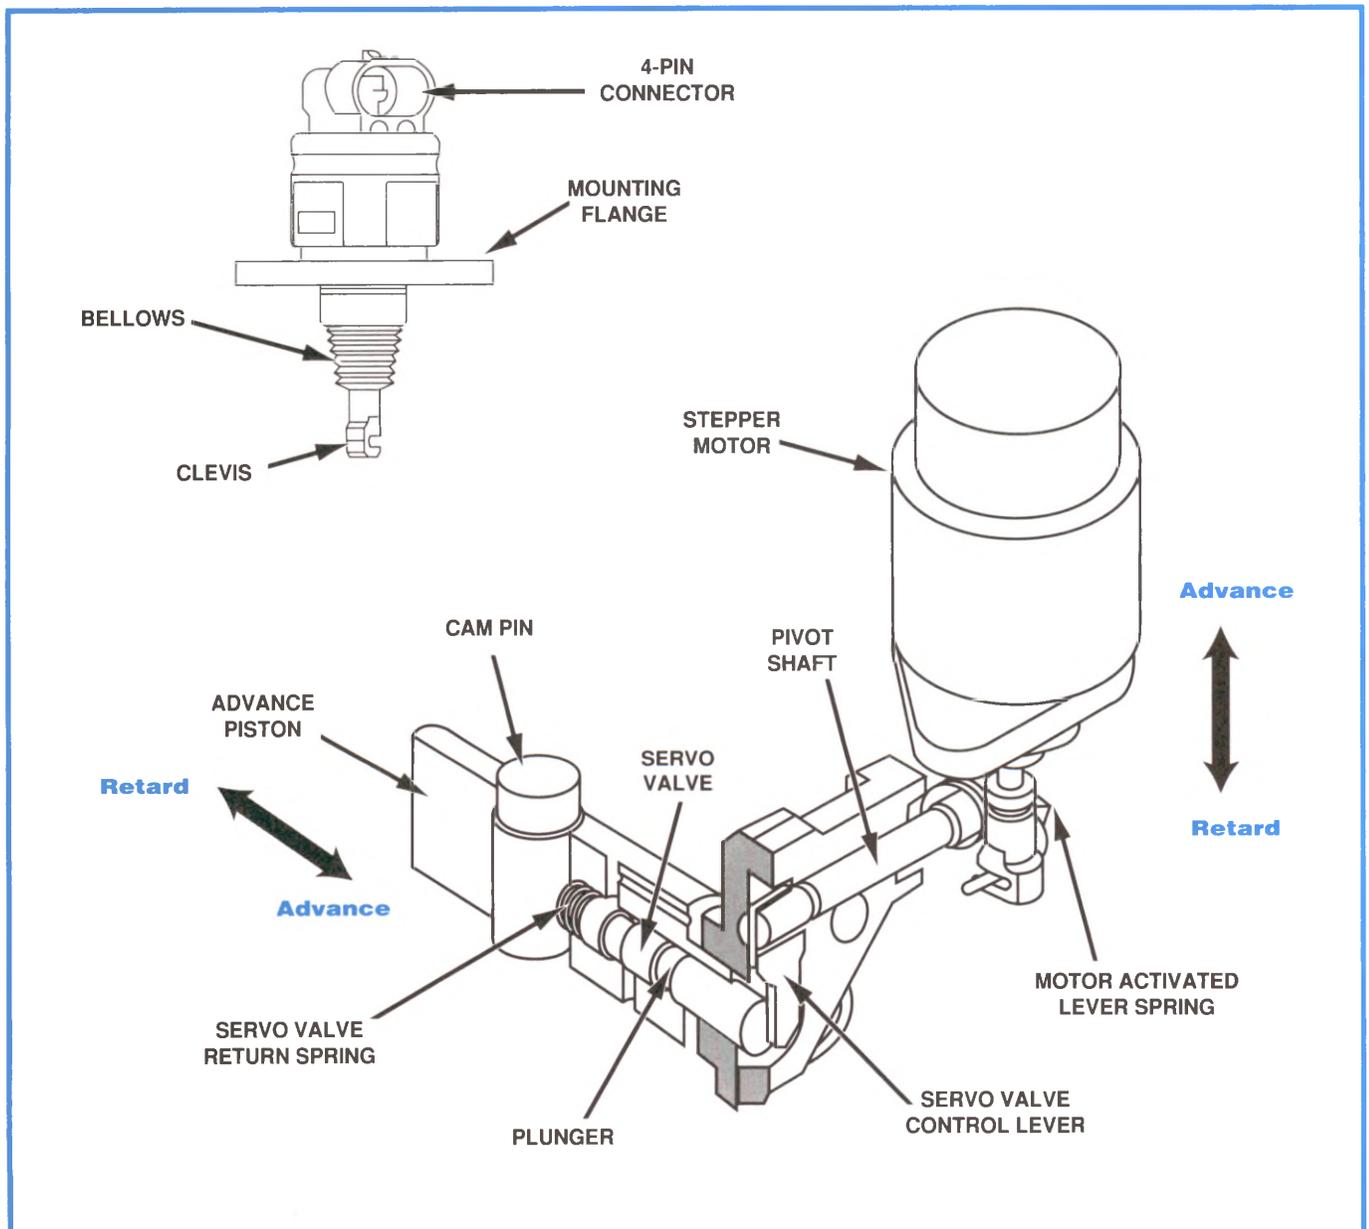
, Injection Timing Stepper Motor/Advance Piston Components
